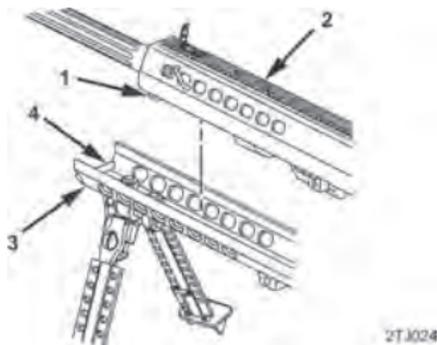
Removing Upper Receiver Assembly from Lower Receiver Assembly.
